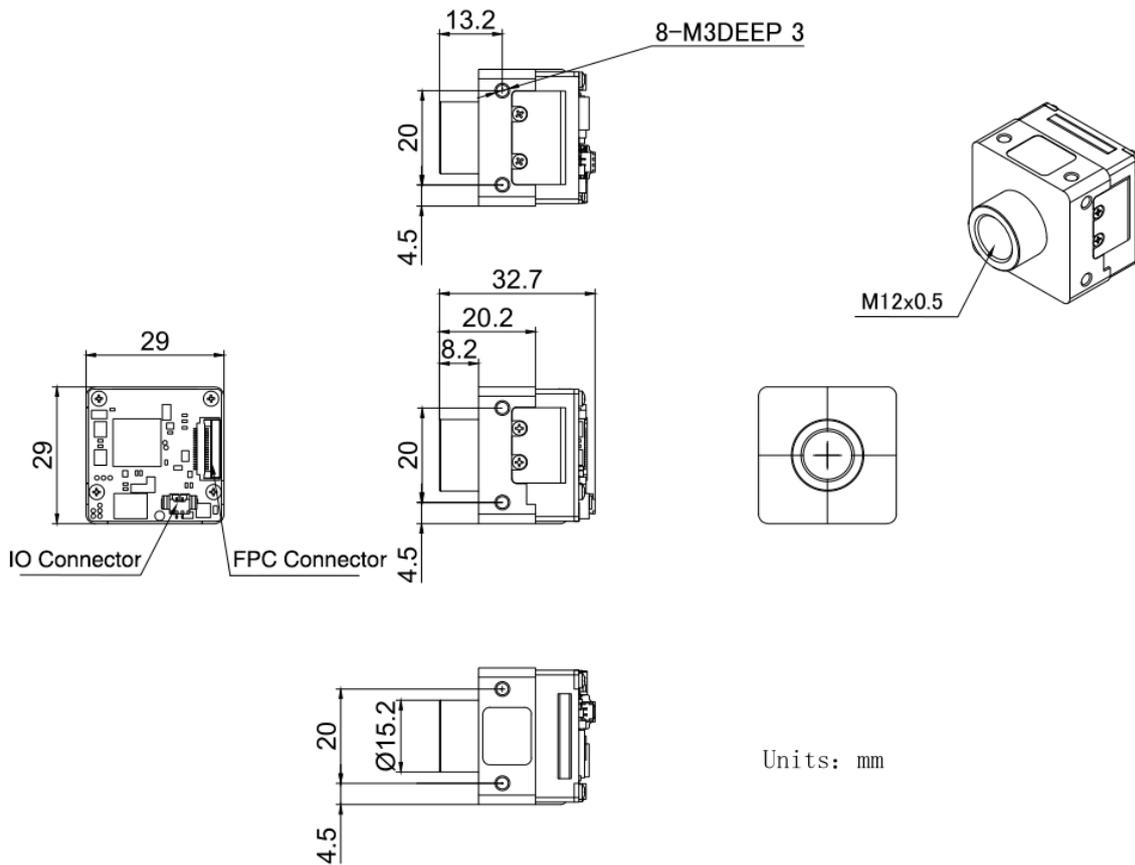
All-in-one horizontal FPC camera mechanical dimensions (S-Mount)
